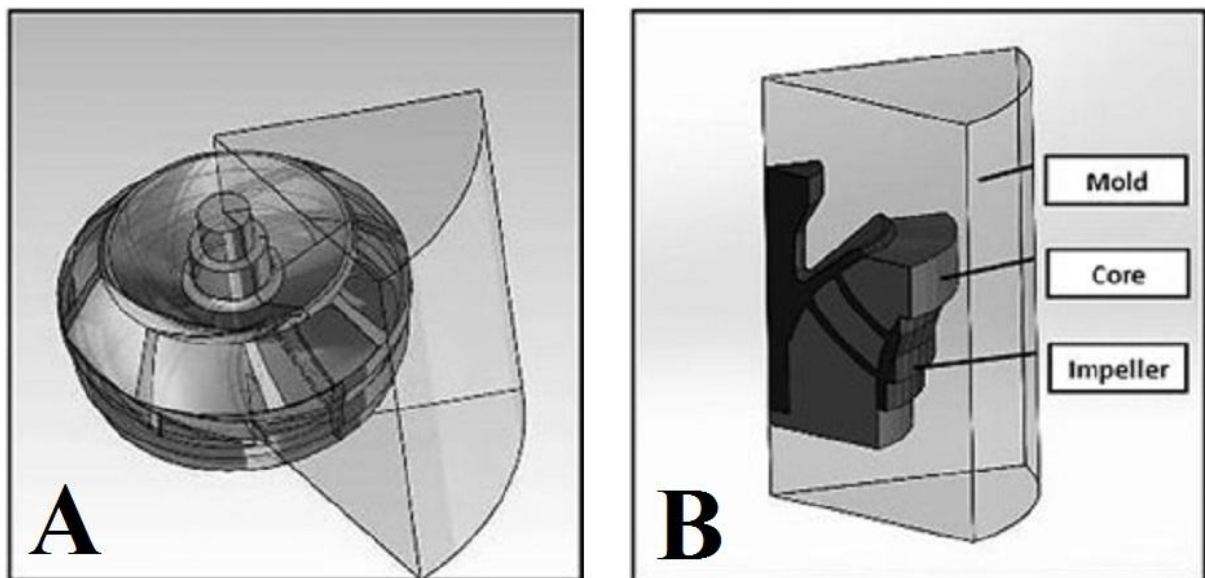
3D drawing of impeller geometry (A) and 3D model as segmented 60° (B)
